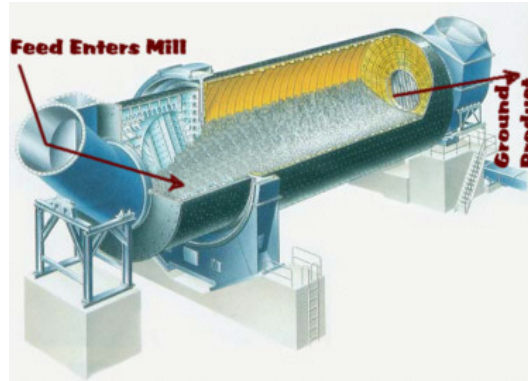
Cut away section of Ball Mill. Source: Ref. # 1
